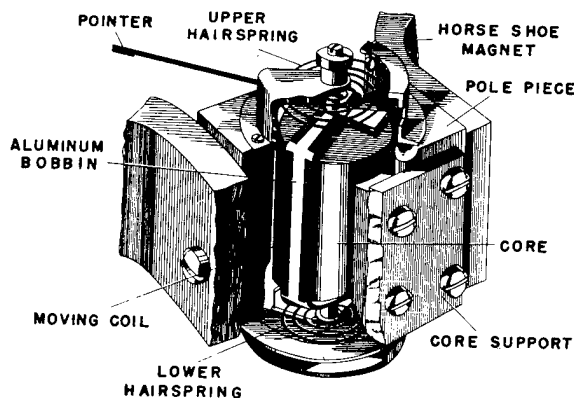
Meter Mechanism—Permanent Magnet-Moving Coil Type
